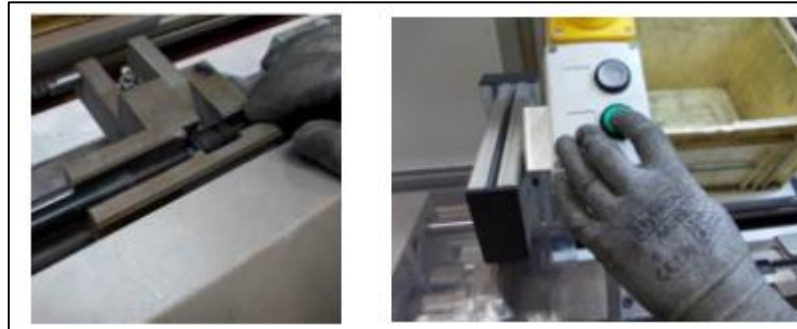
Assemble of the conduit/conduit end fitting subgroup on the jig (left) and pressing the pushbutton (right)
